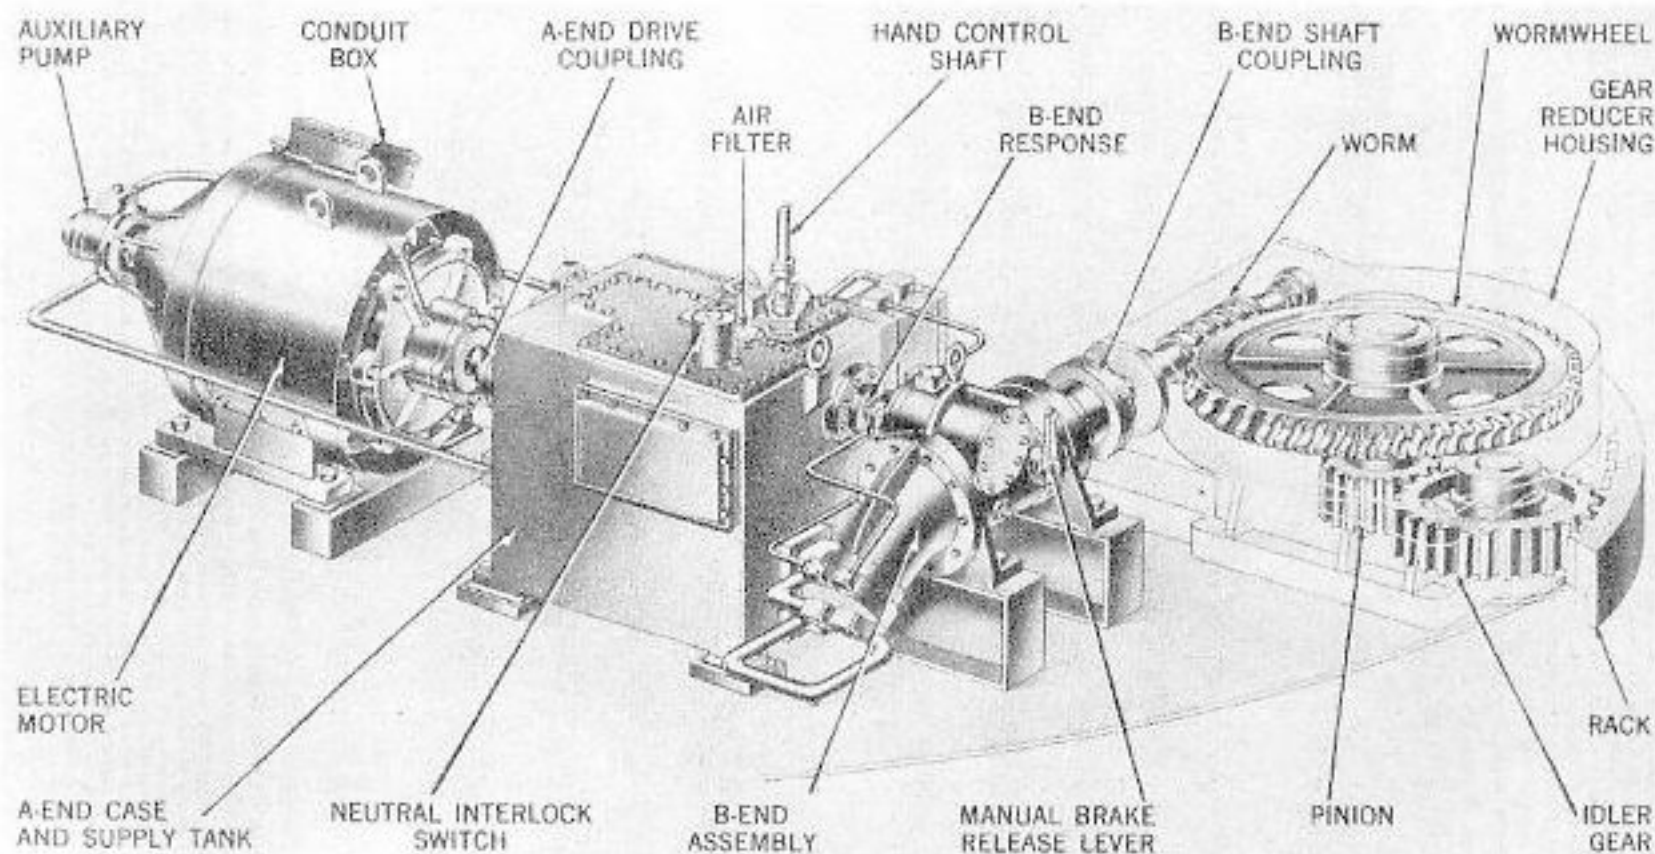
16-inch Projectile Ring Drive Mk 2 Mod 0, General Arrangement
